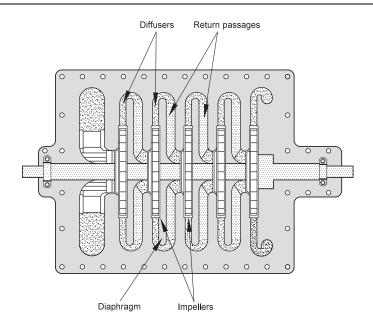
Cutaway of a multistage centrifugal compressor illustrating diffusers, return passages, diaphragm, and impellers.
